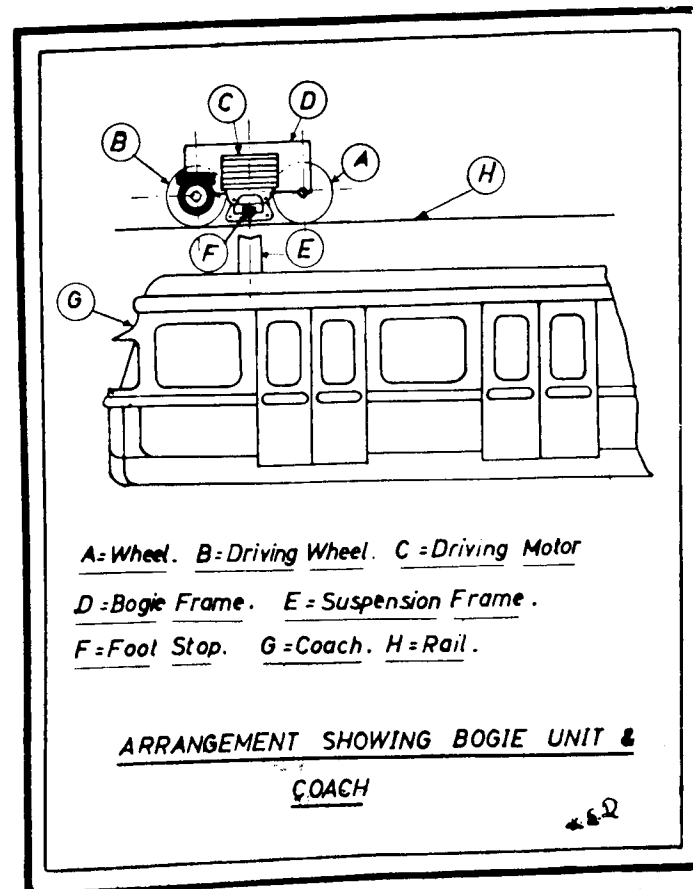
Details showing the arrangement of Bogie unit and Coach.
